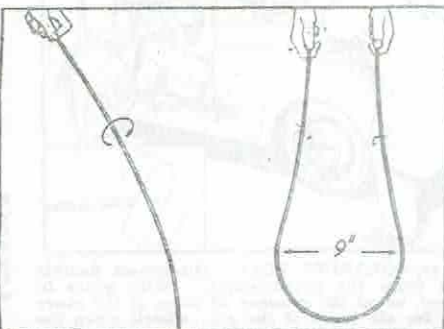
CHECK FOR INNER FLEXIBLE SHAFT. Lay out shaft straight on flat clean table and roll. Any 'kinks' or obvious signs of damage will be seen. Then take an end in each hand, allowing the shaft to hang in a loop of approximately 9 in. diameter. Rotate it slowly with the fingers.
